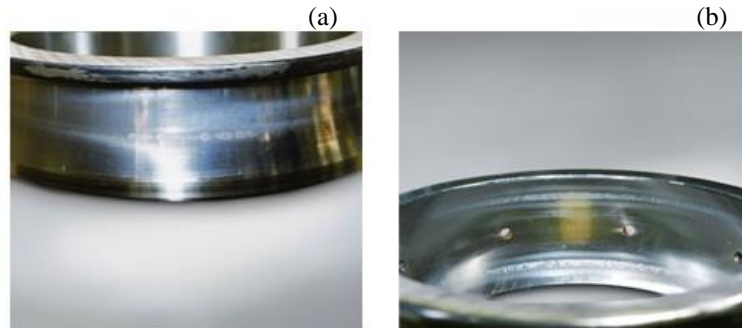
a) Inner ring of a spherical roller bearing b) Outer ring of a spherical roller bearing (Koyo, 2015)
